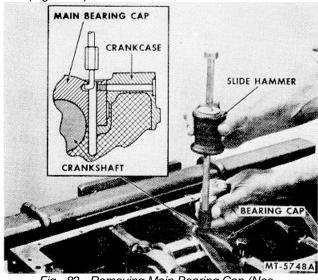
Removing Main Bearing Cap (Nos. 1, 2, 3 and 4)
